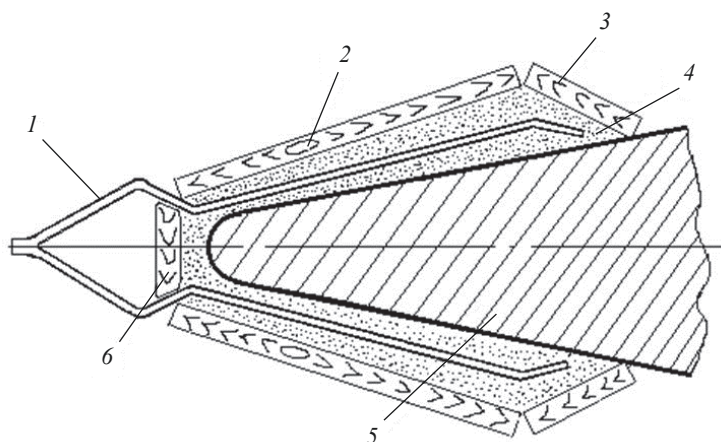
Scheme of detonation hardening of excavator bucket teeth:
